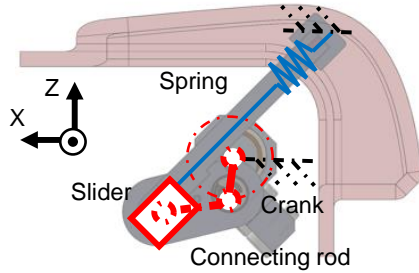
Spring and linkage model of the tongue blade mechanism.
